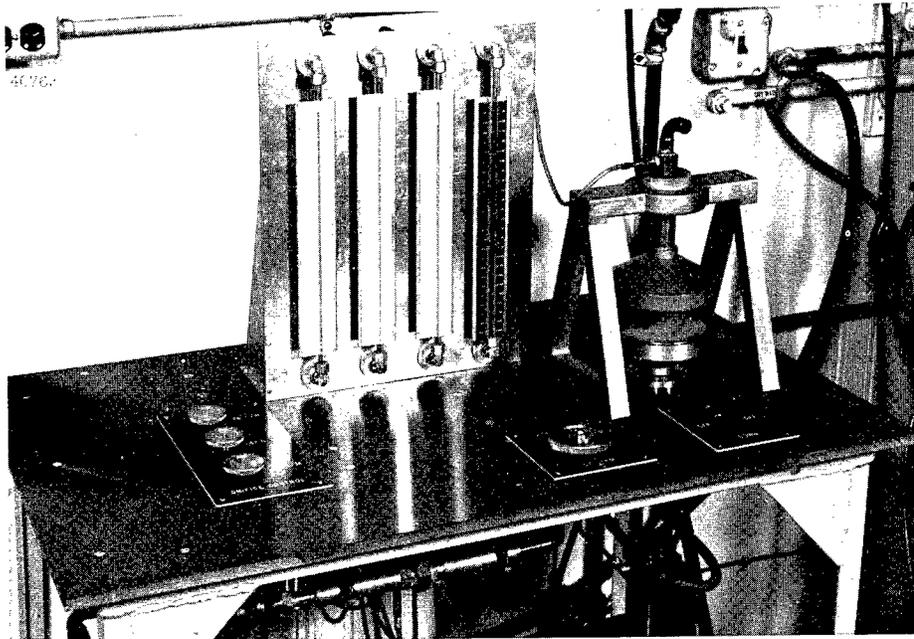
Top view of apparatus showing the clamping chuck and controls
